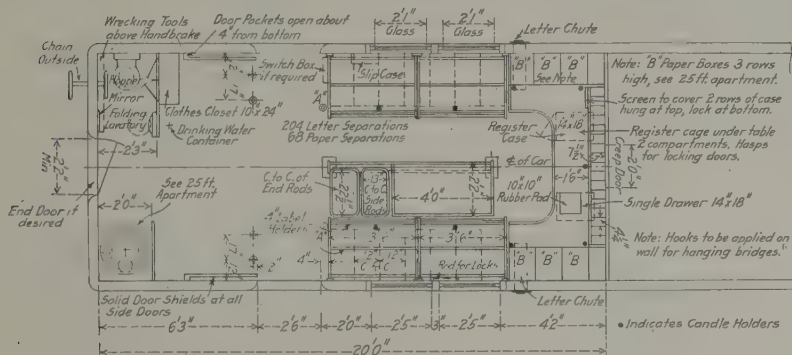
Floor Plan Showing U. S. Government Requirements for 20-ft. Mail Apartment.
